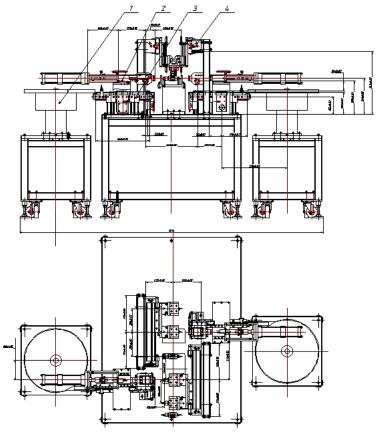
design engineering assembly drawing of automatic press fitting machine for motor rotor bearing
